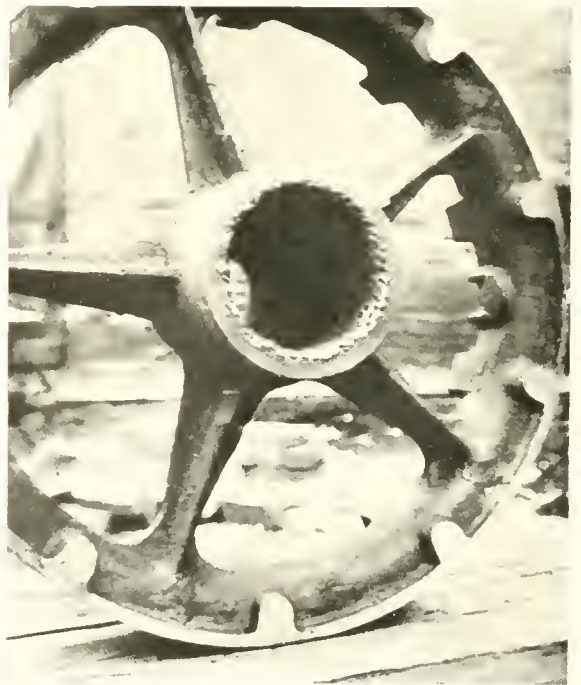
This steel casting was wrongly machined. The bore in the center being machined out too large. This shows how it was built up with a Lincoln Arc Welder and afterwards machined to the proper size, saving the casting from the scrap heap.
